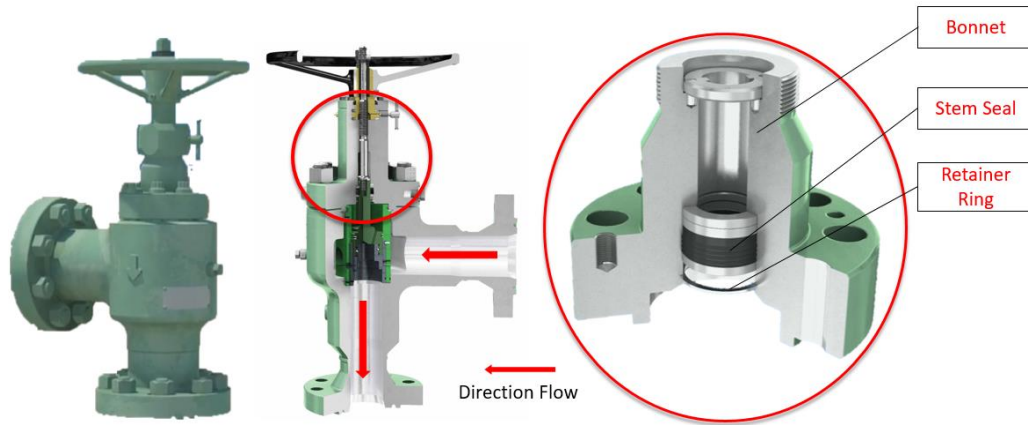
CC30 choke valve assembly illustrating stem seal location [57]
